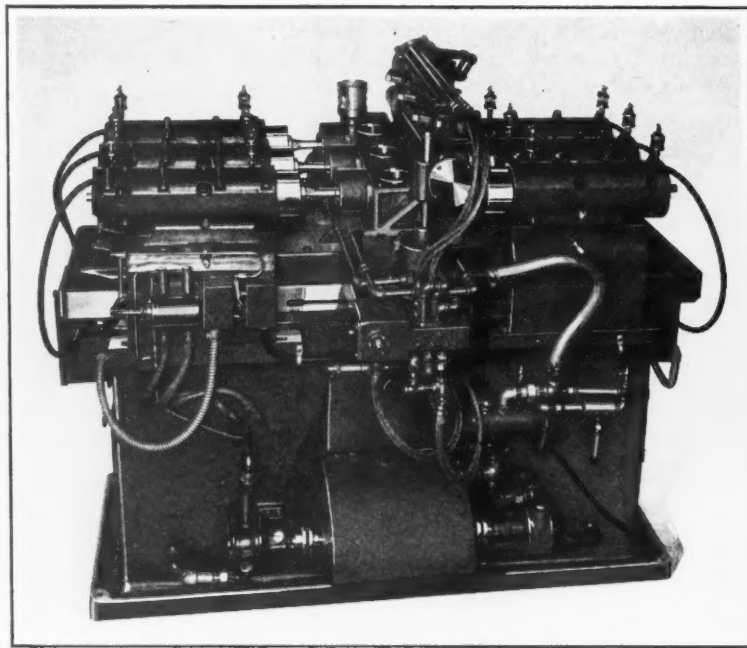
Rear View of Ex-Cell-O Six-spindle Machine, which Rough- and Finish-bores Three Pistons in One Operation
